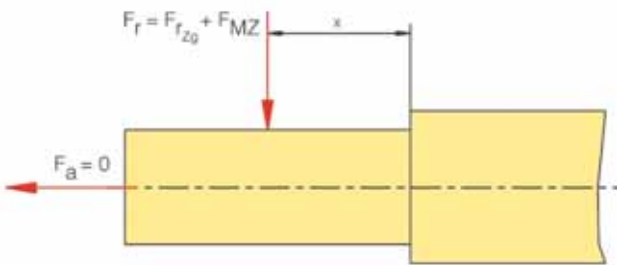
Mechanical drive for a horizontal shaft (spur gears)
